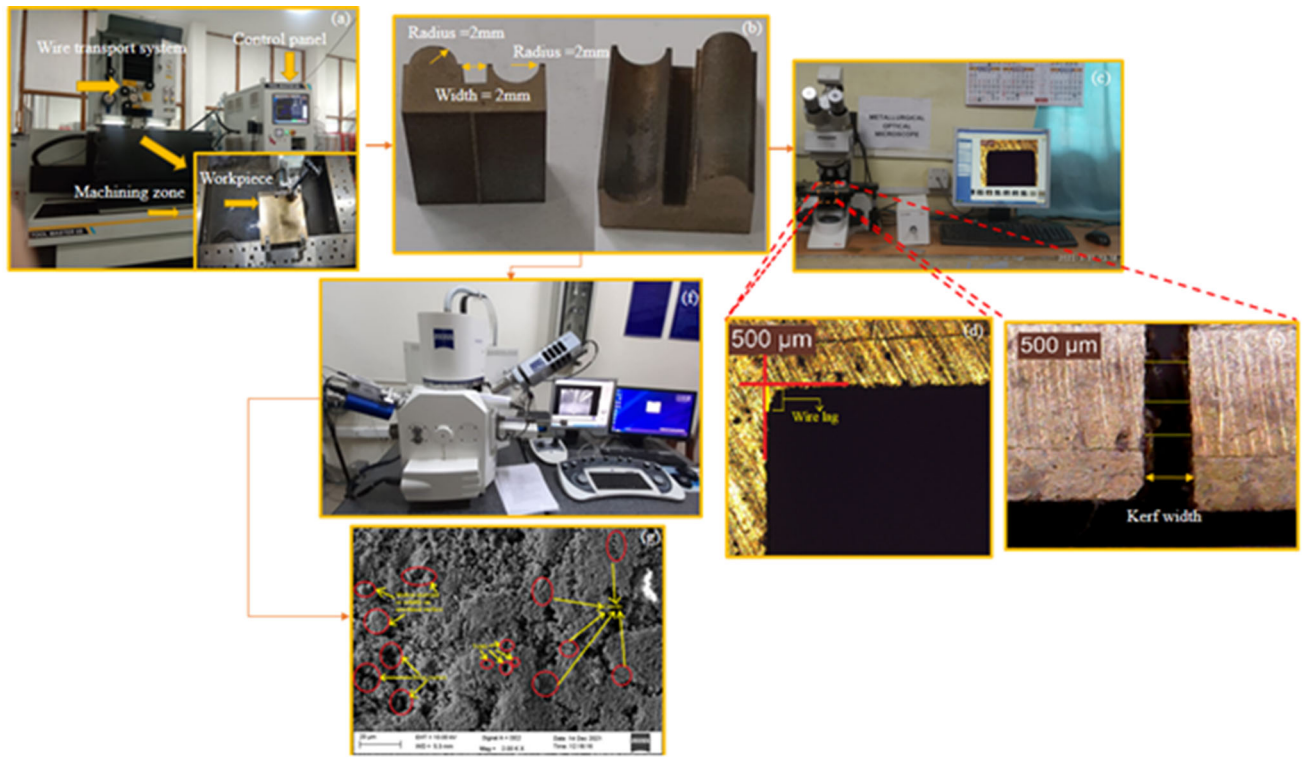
(a) WEDM machine tool setup, (b) complex profile with dimension, (c) optical microscope, (d) corner error, (e) kerf width, (f) FESEM setup, and (g) machined surface at microscopic level
